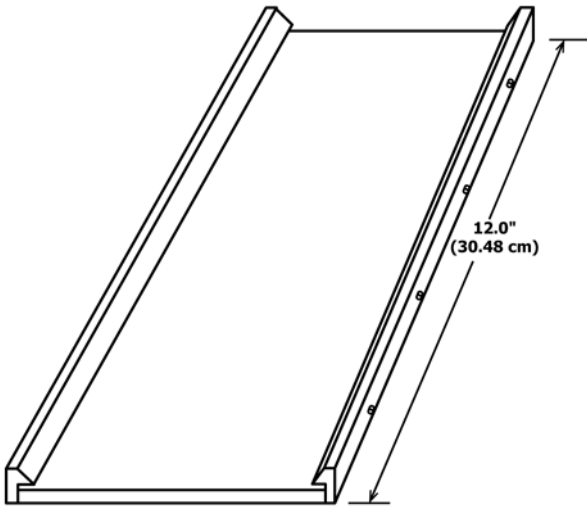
End View of Specimen Holder for Climbing Drum Peel, Minus Specimen
